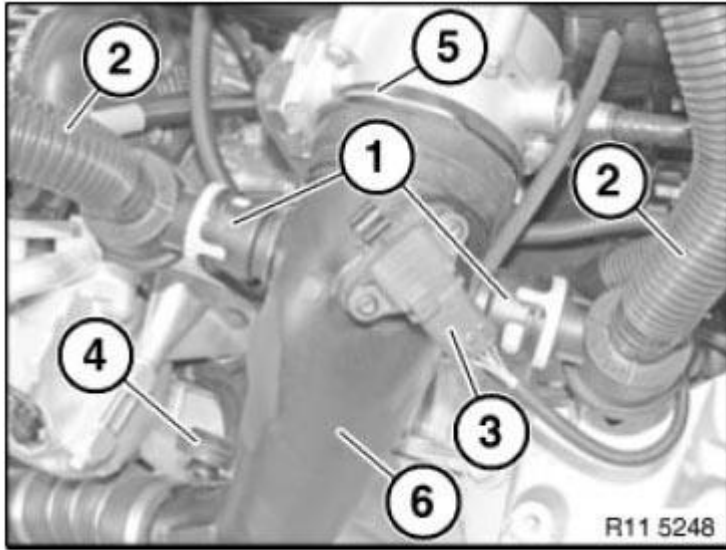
Identifying Charge Air Duct, Air Hoses, Plug Connection And Grommet
